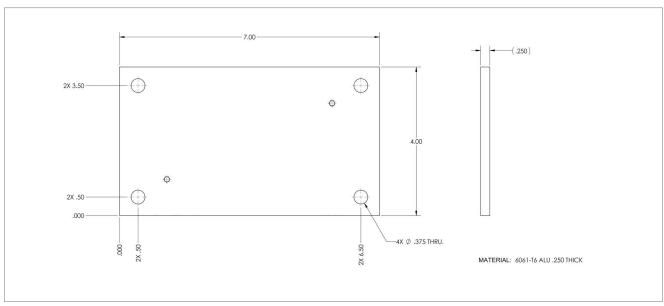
Single-Channel Enclosure (01C-CBL) Models
